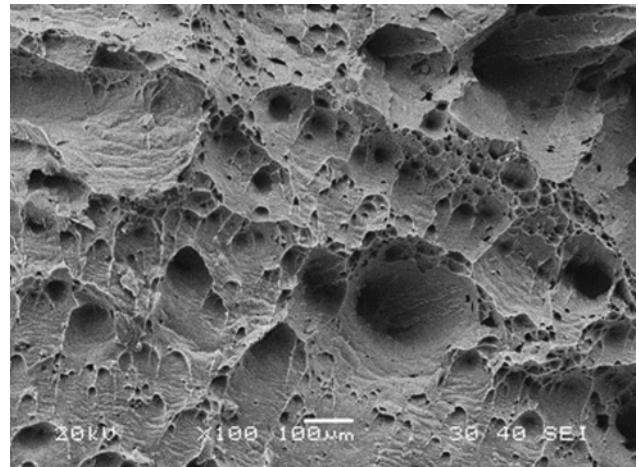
Magnified view of area 2 in weld 16.
